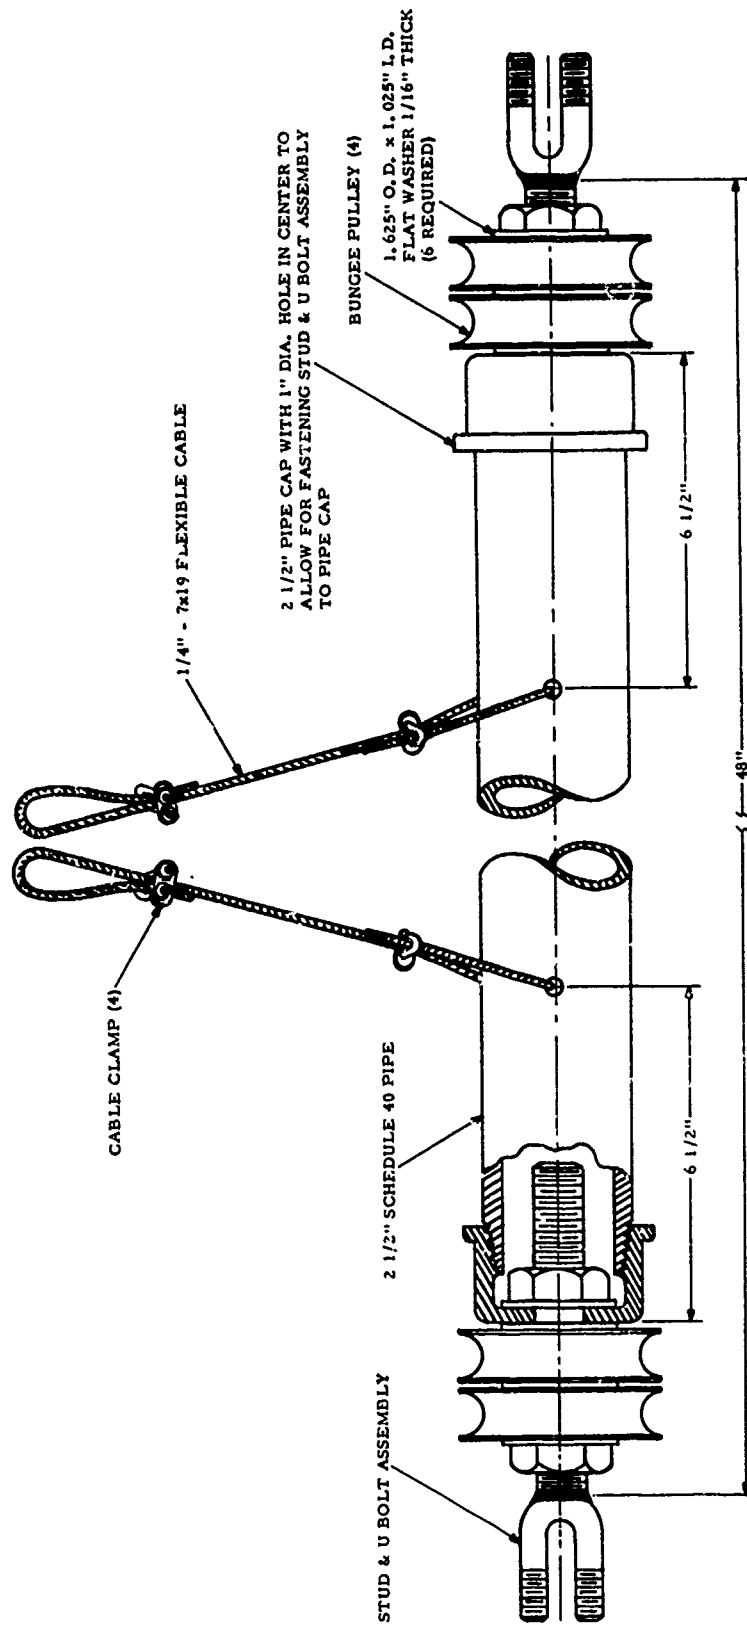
PIPE IMPACT ASSEMBLY
